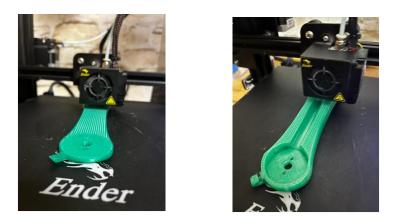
3D printed parts using Creality Ender 3 Pro printer
